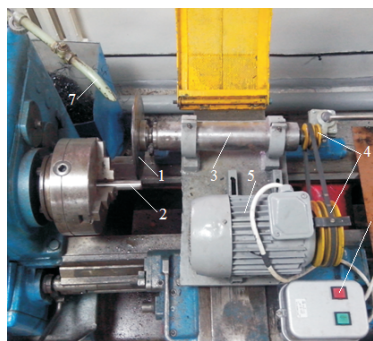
Process of thermofrictional cutting. 1 – processed preform, 2 – cutting disk, 3 – spindle, 4 – driving and driven pulleys, 5 – electric motor, 6 – control panel, 7 – feeding system of refrigeration fluid
